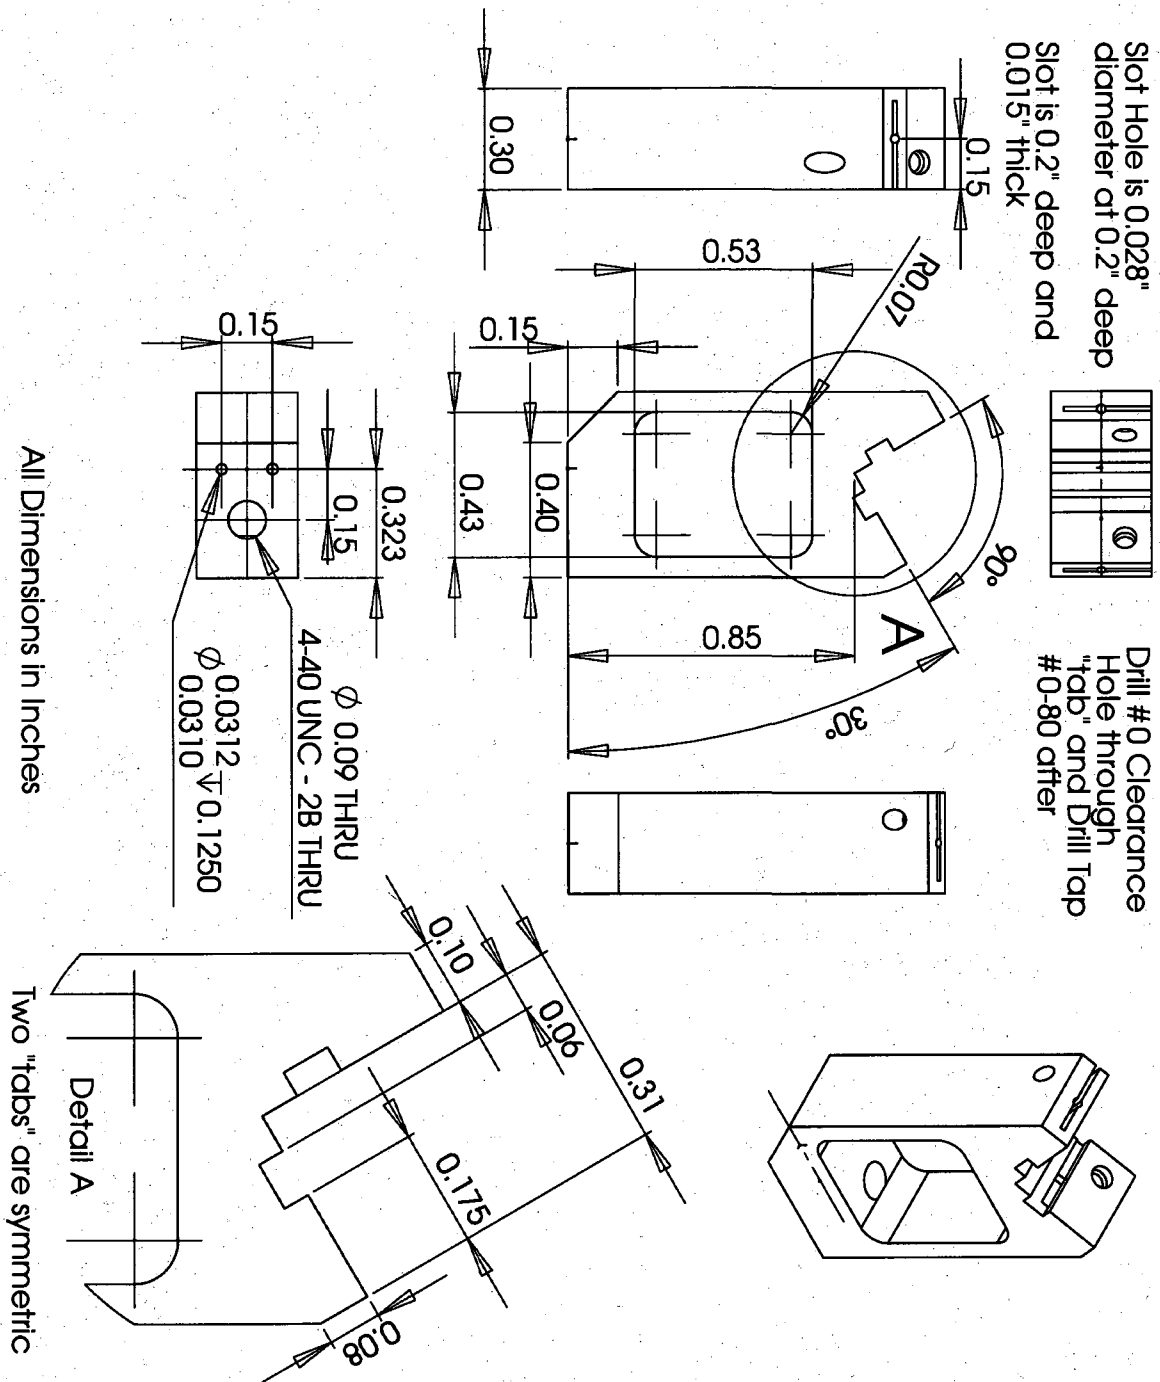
Mechanical Drawing: Pendulum angled wire mount.
